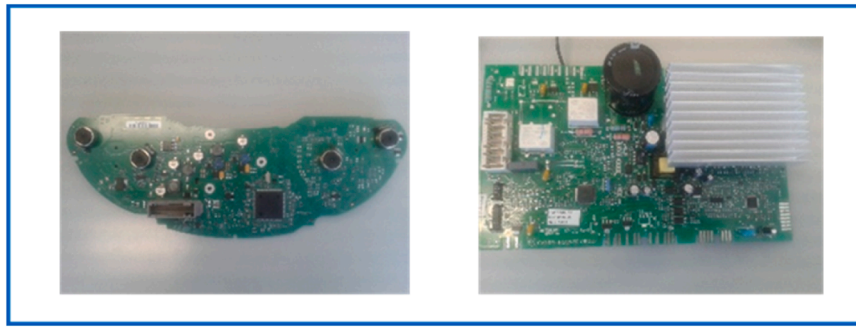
Automotive PCB 1 and Household appliance PCB 1.
